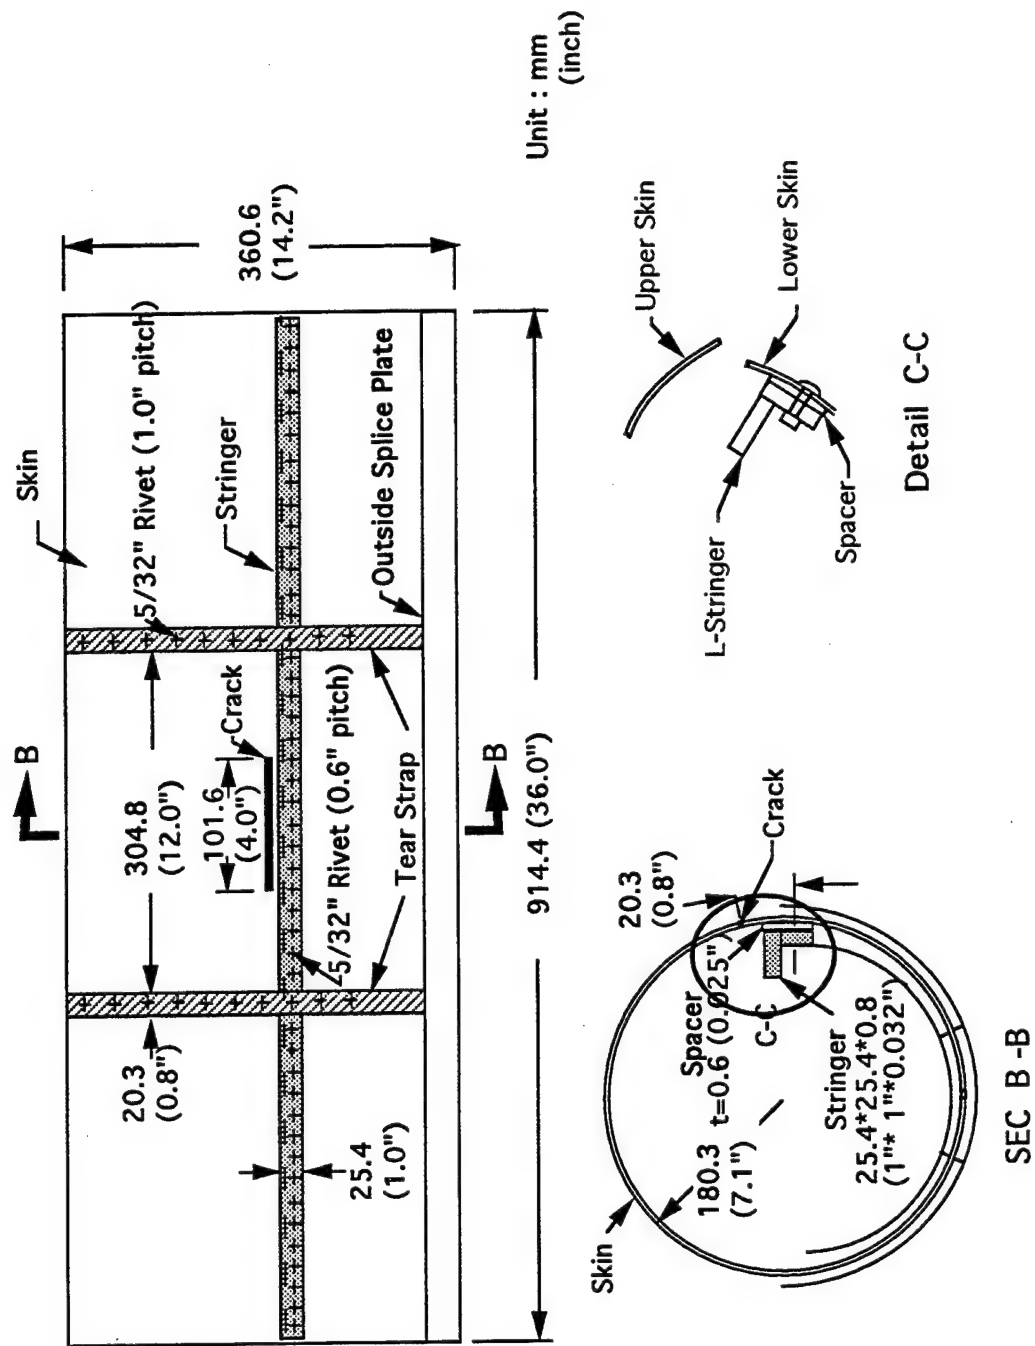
SCHEMATIC DRAWING OF ONE-SIDED CRACK OPENING
